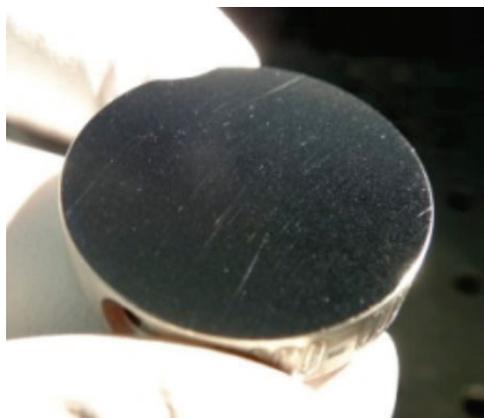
Picture of one of the aluminum samples during a visual inspection before coating.
